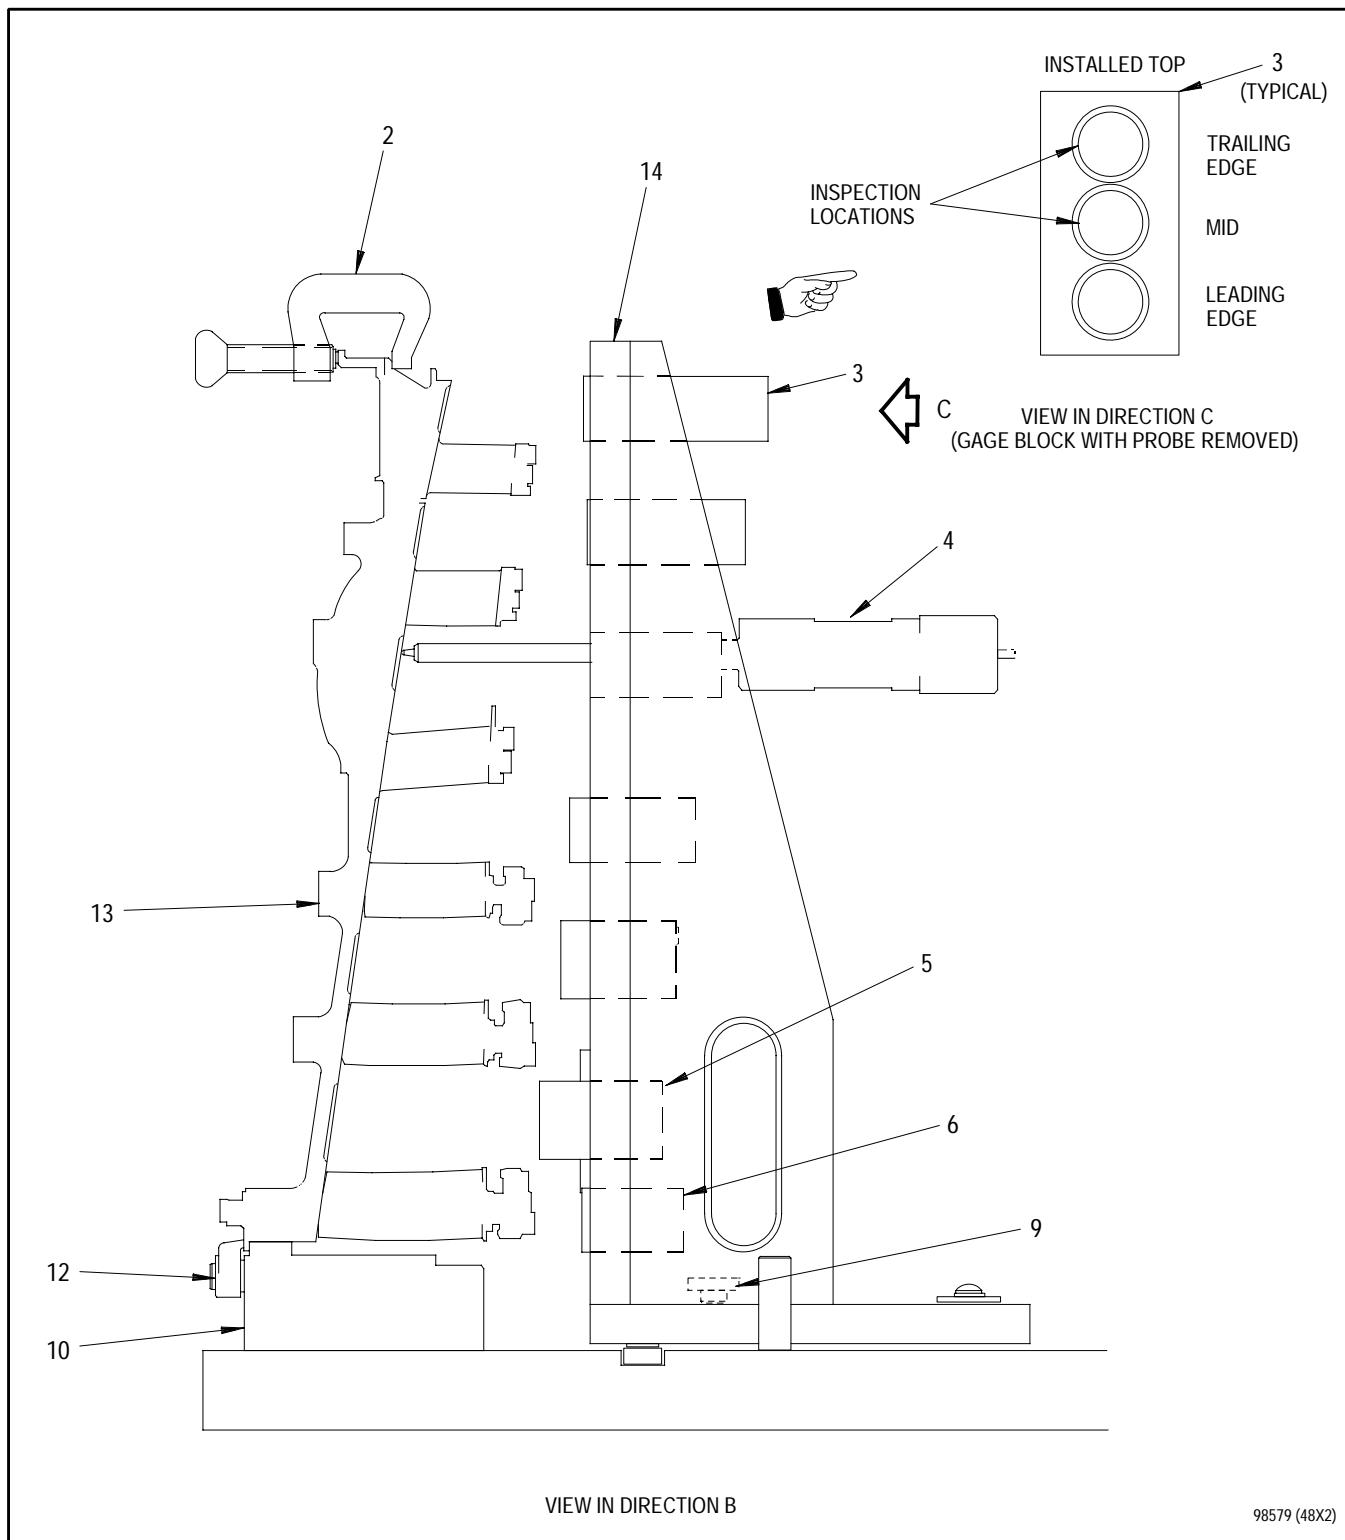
Fifth Through Tenth Stage Compressor Blade Tip Shroud - Radial Clearance Measurement (Sheet 2 of 2)
